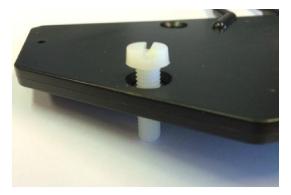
shows MIMO-Blade with 6mm bolt and locking nut
